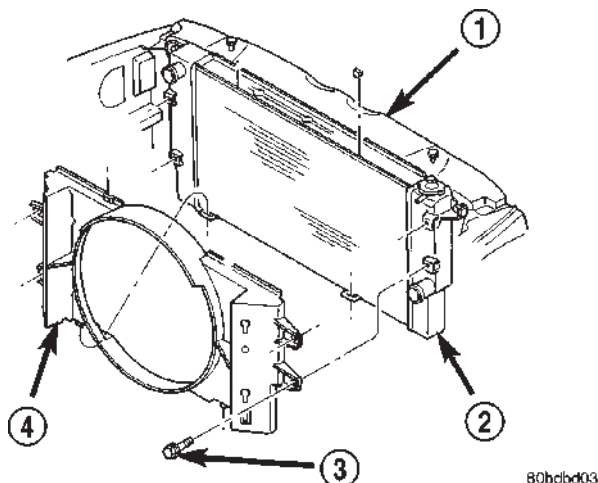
Fan Shroud Mounting—5.9L Diesel Engine
